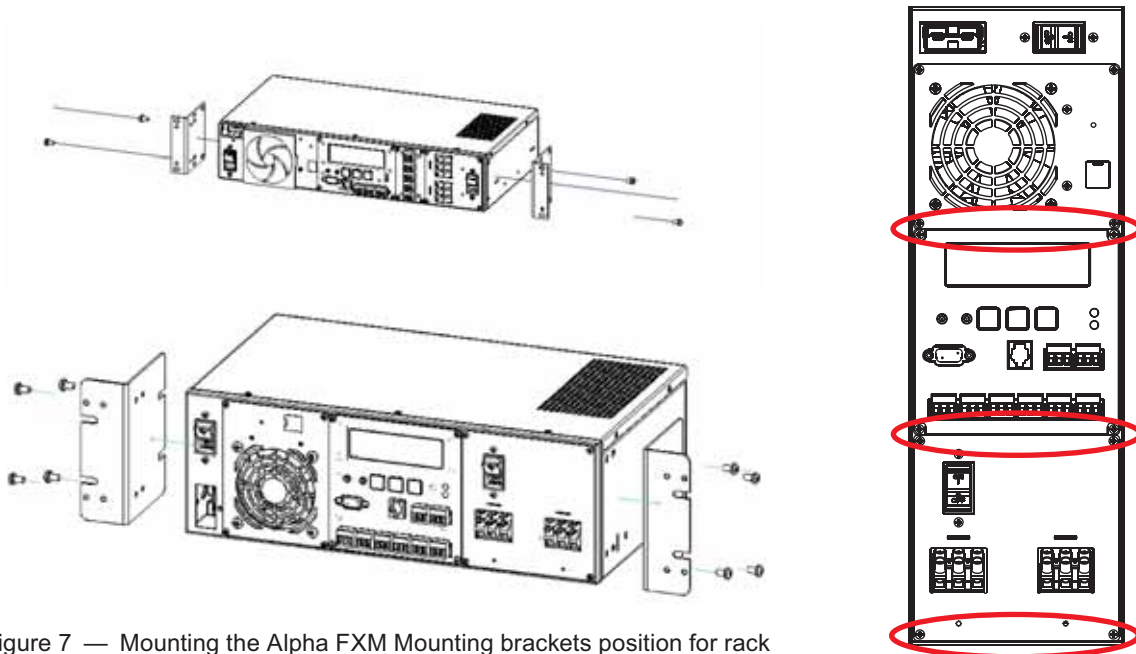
Mounting the Alpha FXM. Mounting brackets position for rack mounting. Rotate to fit either 19" or 23" racks.
